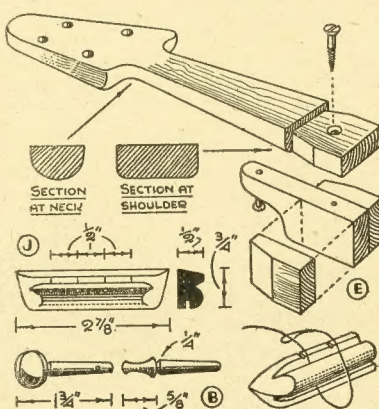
Detail of handle at shoulder; piece J is bridge, B peg shape, etc.
